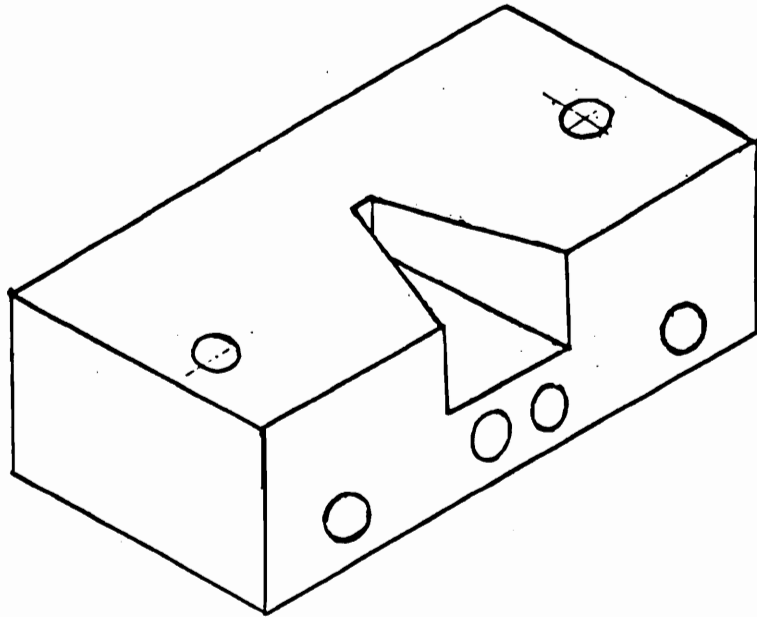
(a): Isometric view of the bottom half of the inlet section
